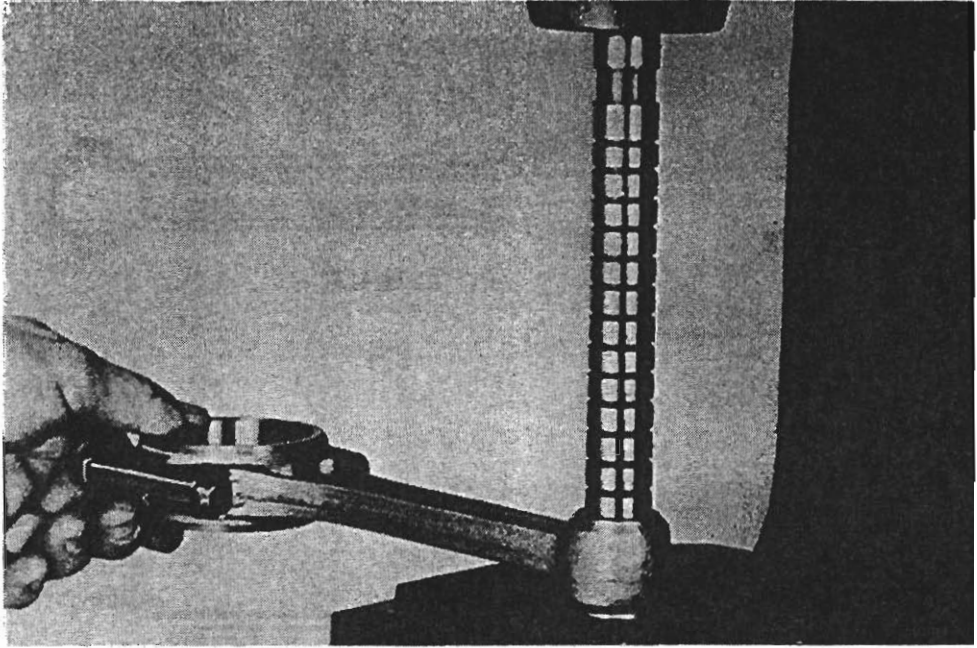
The Split Type Piston Pin Bushings Should Be Burnished Separately and from the Inside as Shown.
